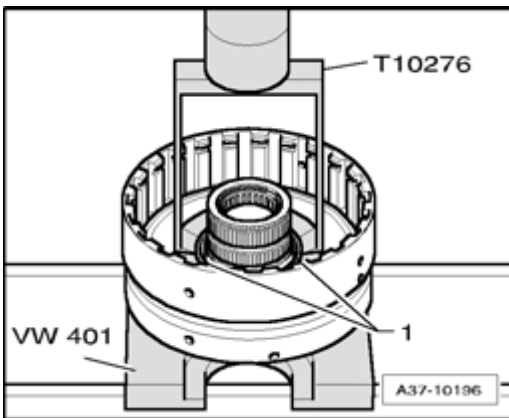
Installation Bracket T10276 And Split Retaining Ring
